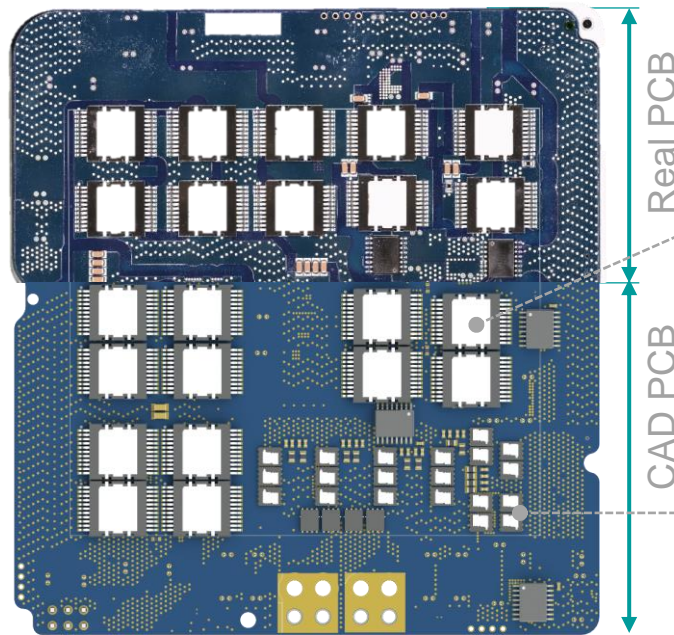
Internal Structure of Power Stage PCB showing top copper layer with vias, traces and power devices.
